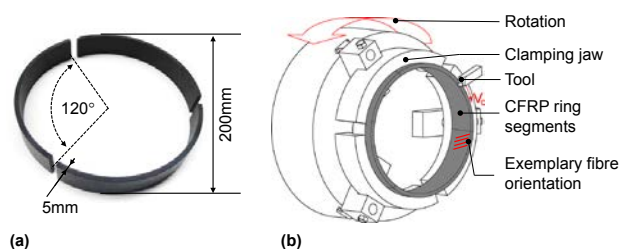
(a) segmented ring specimen and (b) schematic illustration of the test-rig setup for orthogonal cutting experiments
